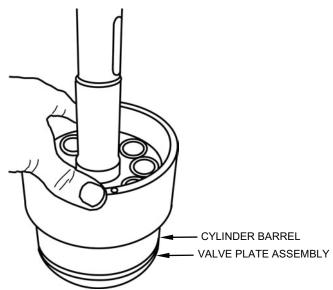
Installing Cylinder Barrel onto Valve Plate.
